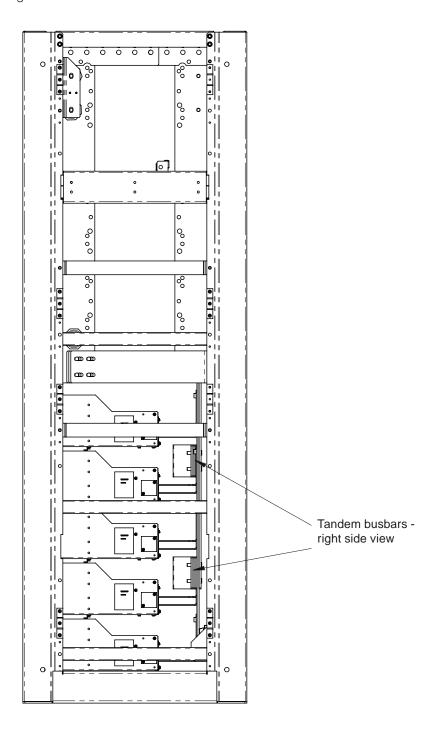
Tandem system busbar installation, bay shown with panels removed
